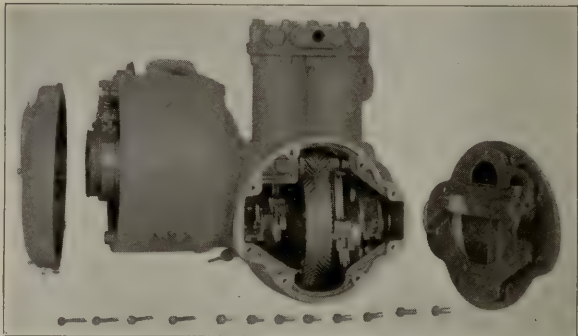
Motor Driven Air Compressor with Motor and Compressor Covers Removed. General Electric Company.
